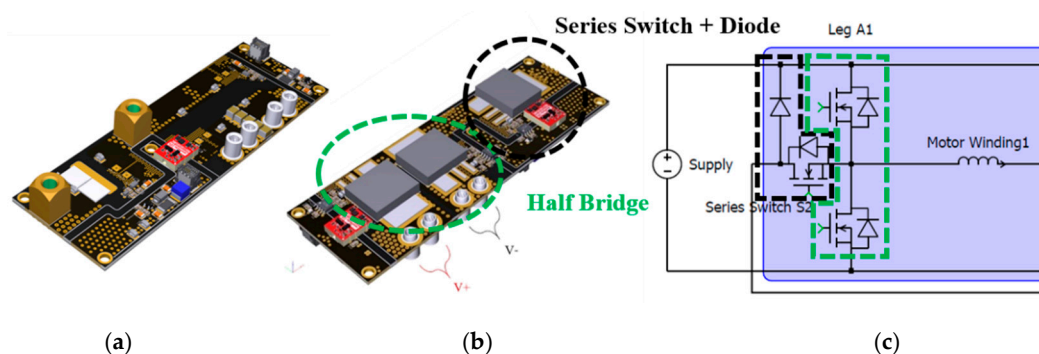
(a) Top side of power PCB with GaN device; (b) bottom side; (c) electrical circuit of one leg.
